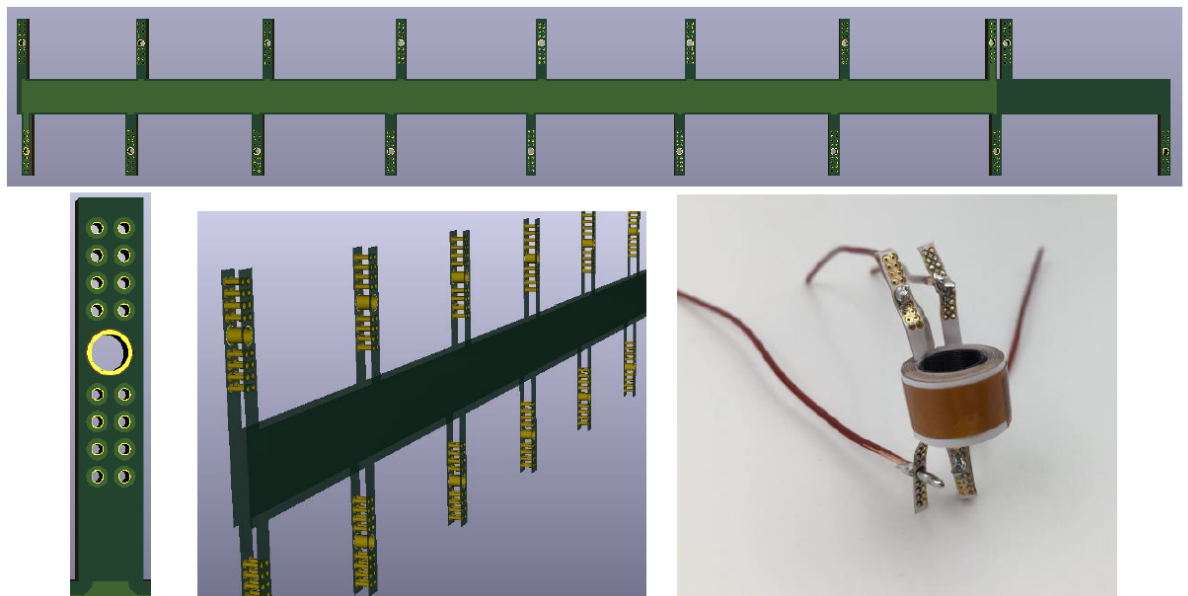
Top, KiCAD layout of flex PCB with dimensions of 269.75 x 36.4 mm (including height of soldering tabs). Bottom right, soldering tabs with dimensions 2.35 x 14mm, and vias diameters 1.35 mm (center) and 0.4mm (small). Bottom center, side view of flex PCB with vias. Bottom right, wound flex PCB on core bobbin.
